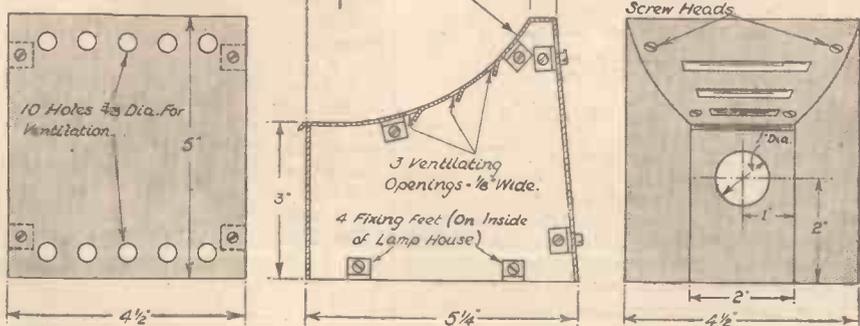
Views of the apparatus from each side, which will assist you in assembling the parts.
